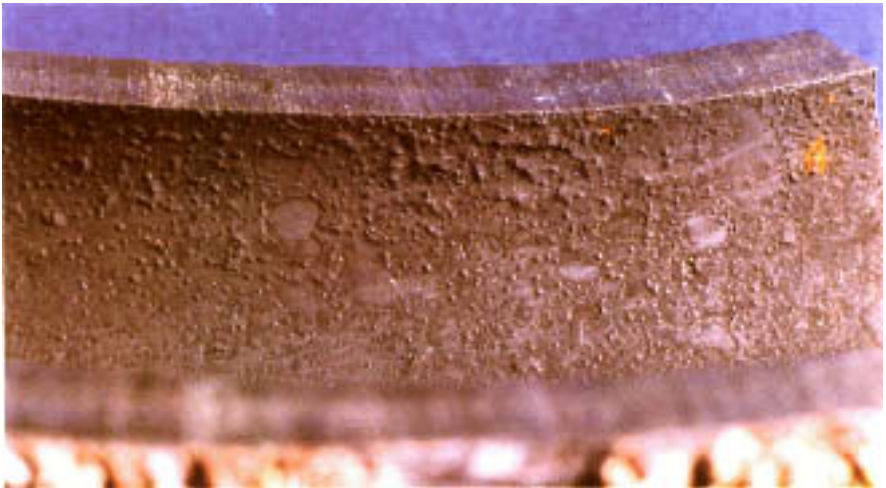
Magnetite blisters on the internal surface of a U-bend in a primary superheater. Note that the magnetite has spalled in places.
